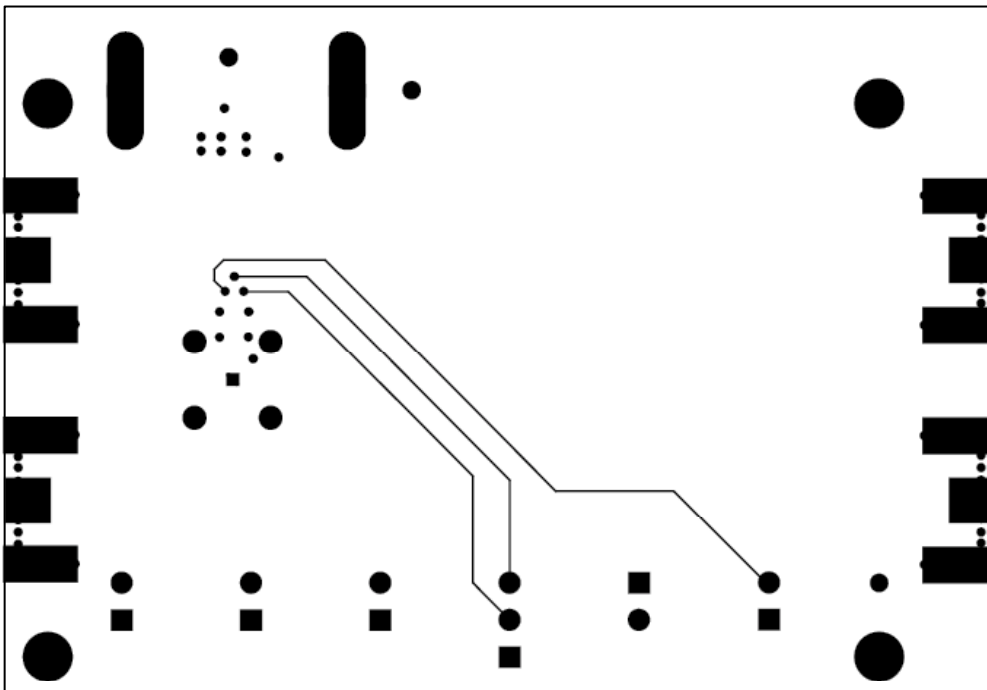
MAX3982 EV Kit PC Board Layout – Bottom, Layer 4
